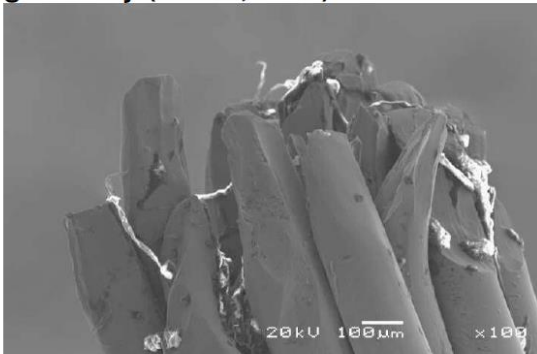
Fractograph showing fracture geometry of a mechanically severed cable (x100, SEM)
